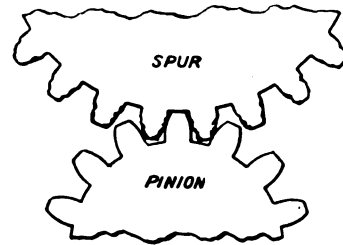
Spur and pinion wheels with the spur wheels badly chipped.
